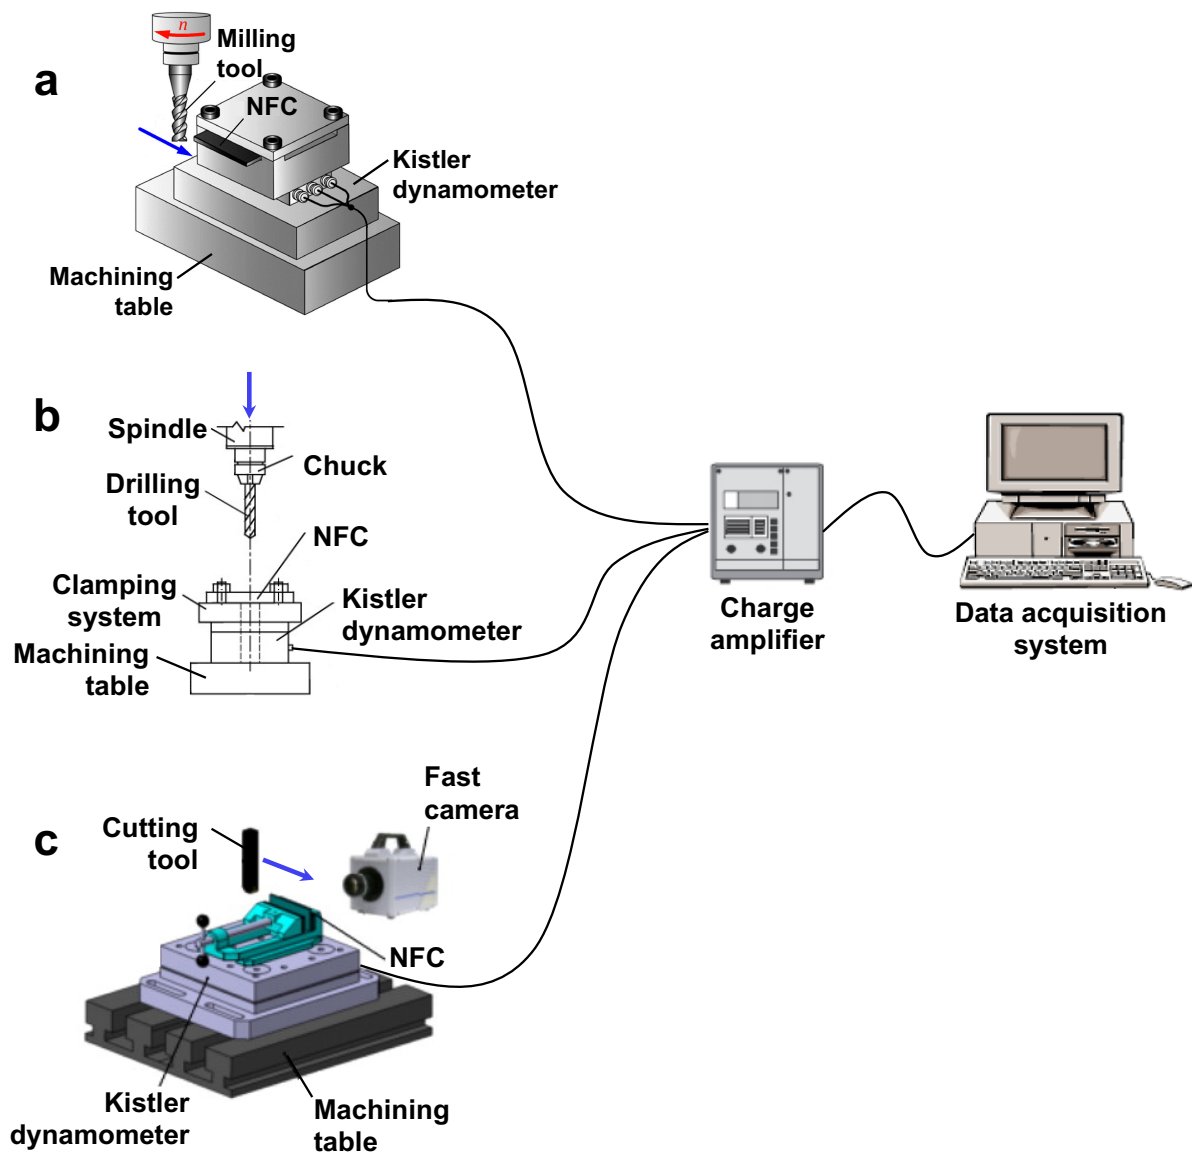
Schematic illustration of the experimental machining setup. (a) milling, (b) drilling, and (c) orthogonal cutting
